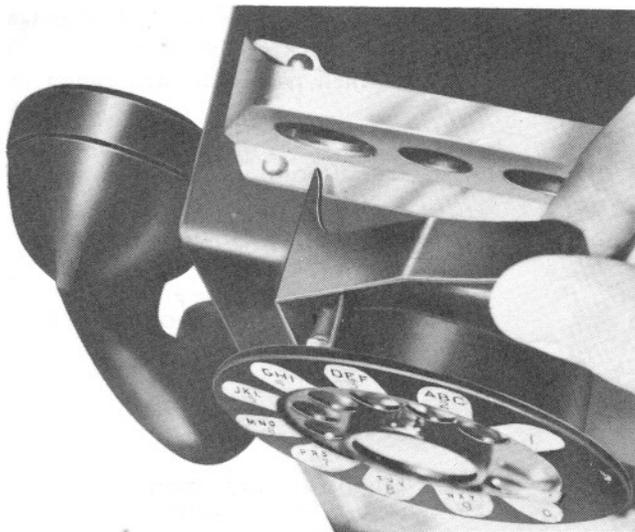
METHOD OF INSTALLING P-14A544 COIN DEFLECTOR
